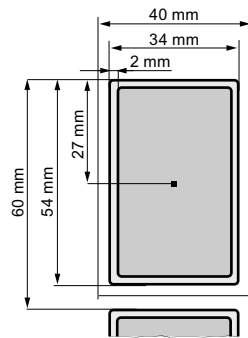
SIMATIC RF630L 6GT2810-2AB03 dimension drawing
